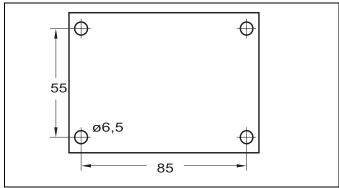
Hole pattern for the stand for U 4814 circulating pump
